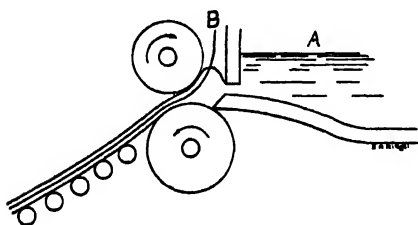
Apparatus for the continuous drawing of wire glass. A, the glass furnace, working end; B, sheet of iron wire.
